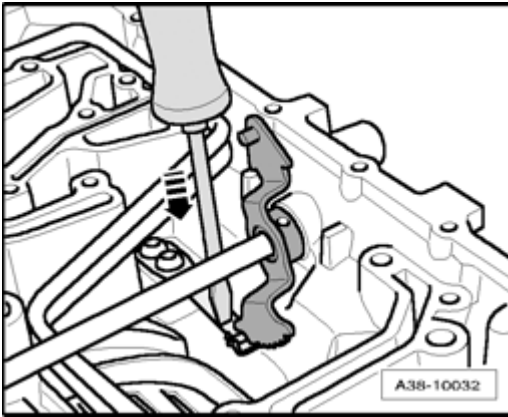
Pressing Catch Spring Downward Using Screwdriver
